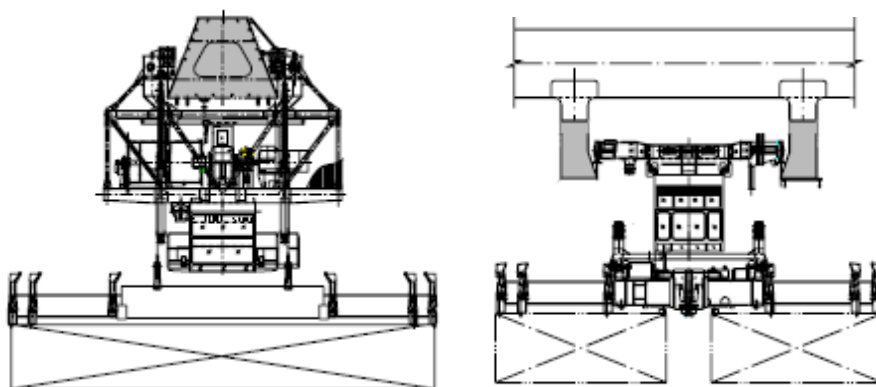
Machinery trolley/monogirder and rope trolley/twin girder (Kalmar, 2011).
